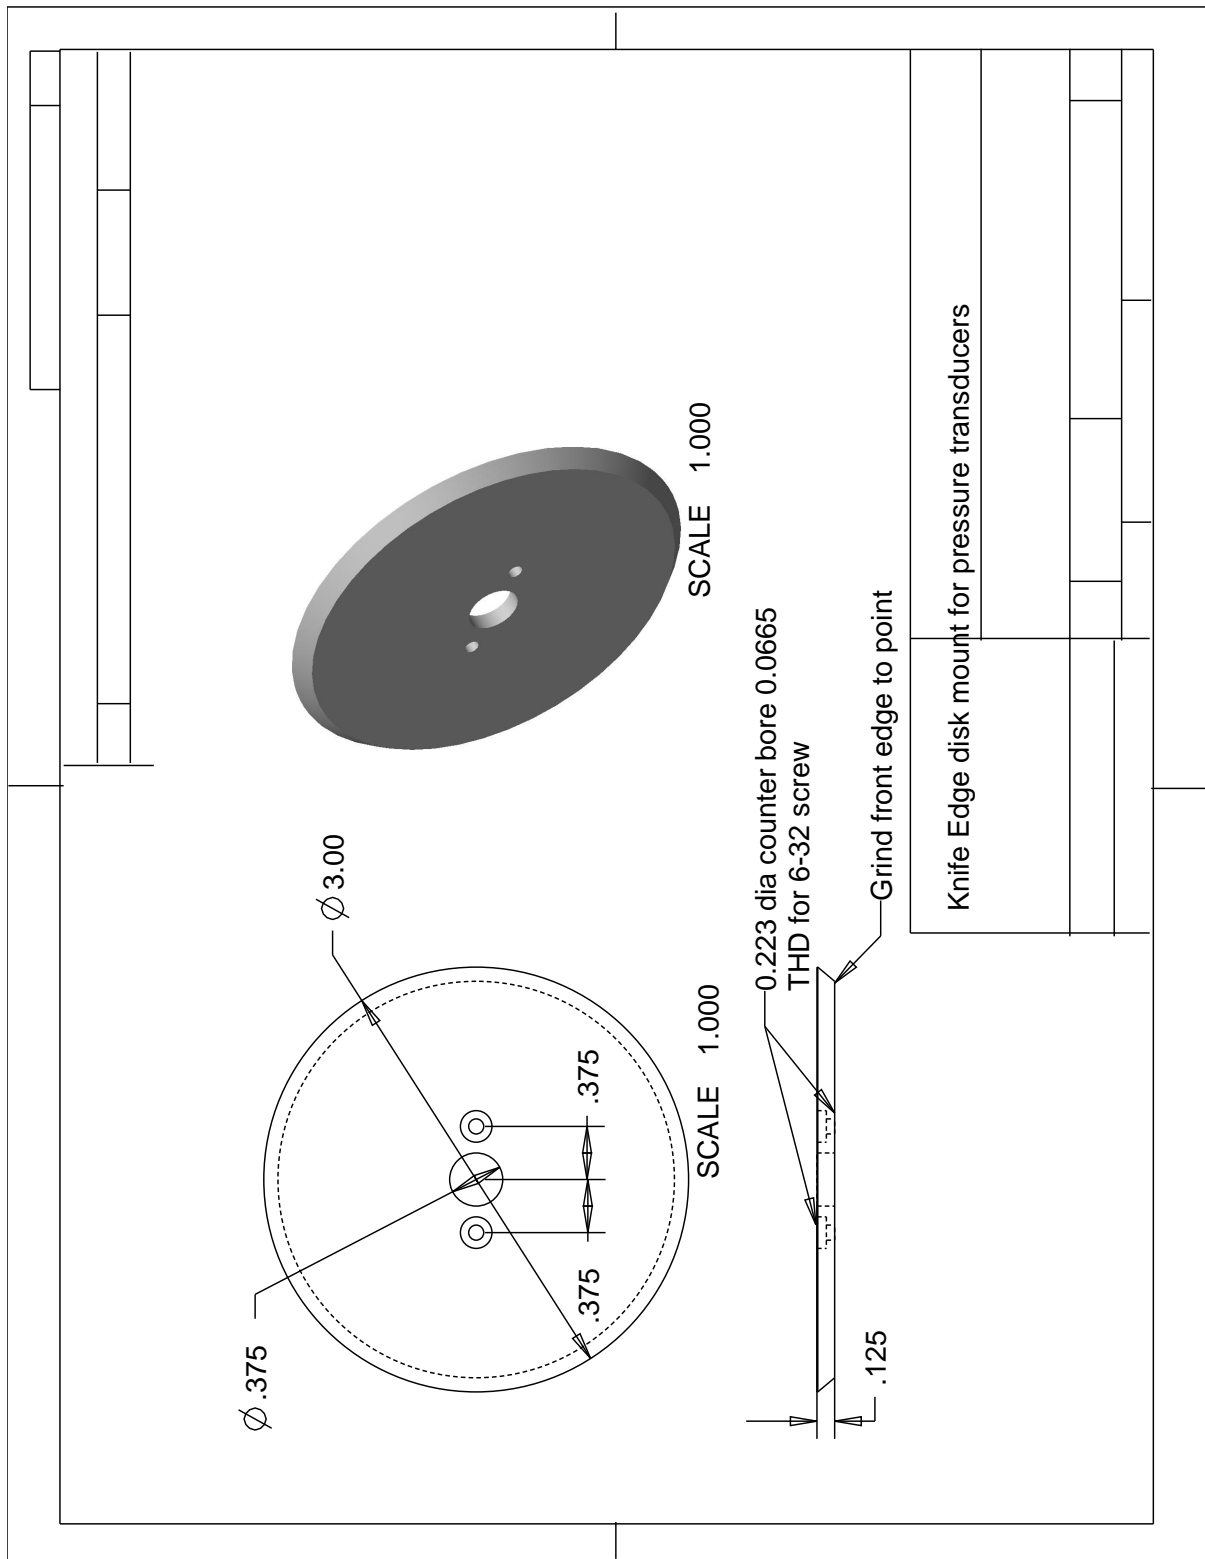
Knife edge flat plate for piezo-resistive pressure transducer mount.
